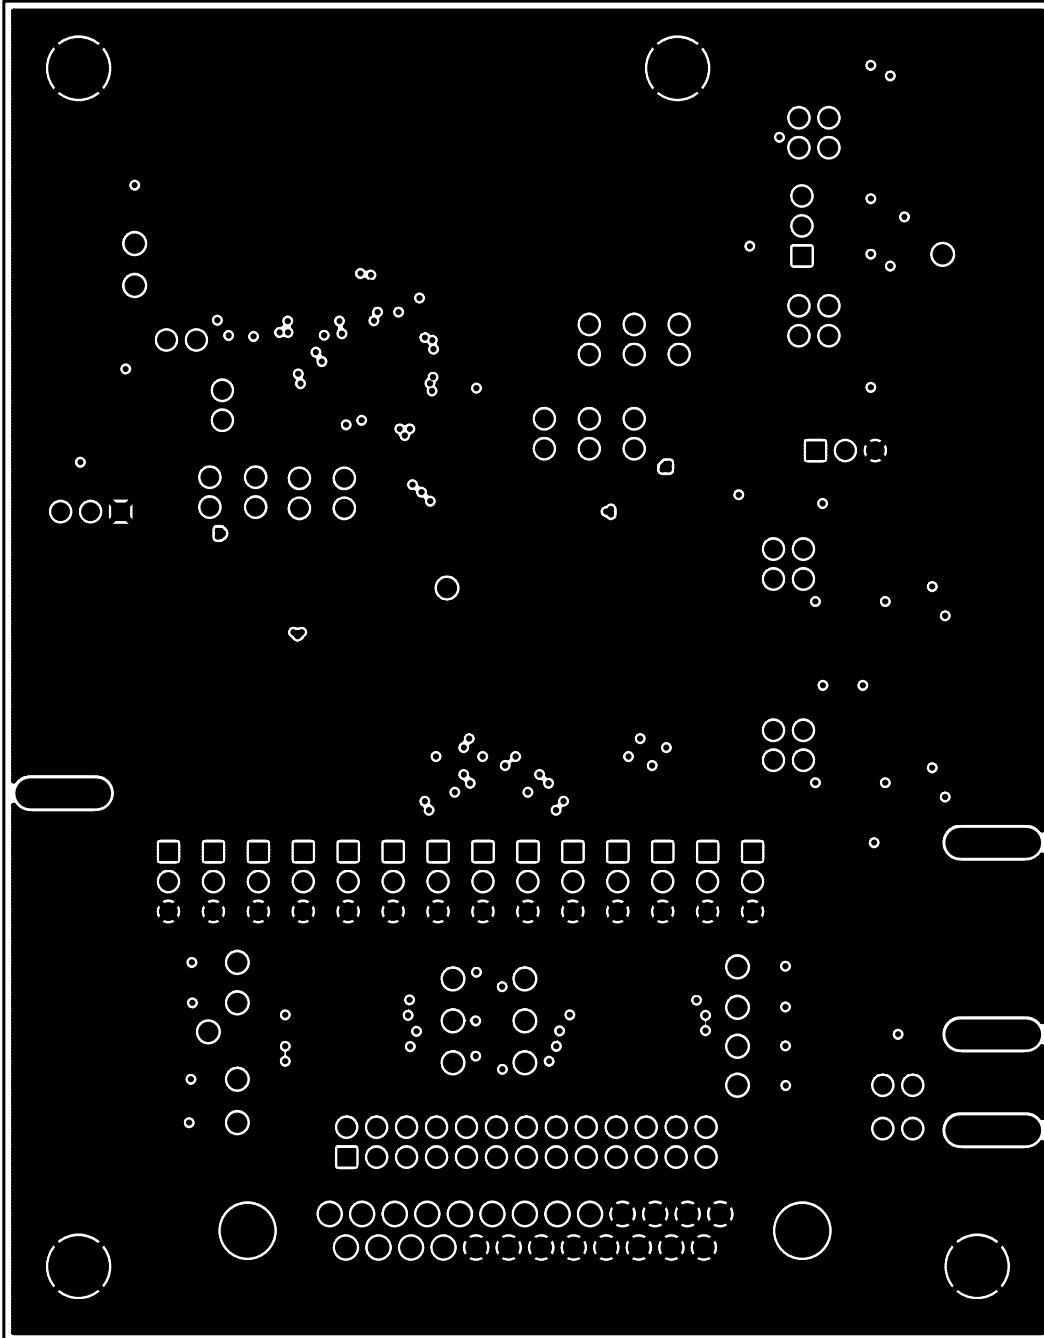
MAX2838 EV Kit PCB Layout—Inner Layer 2, Ground Layer
